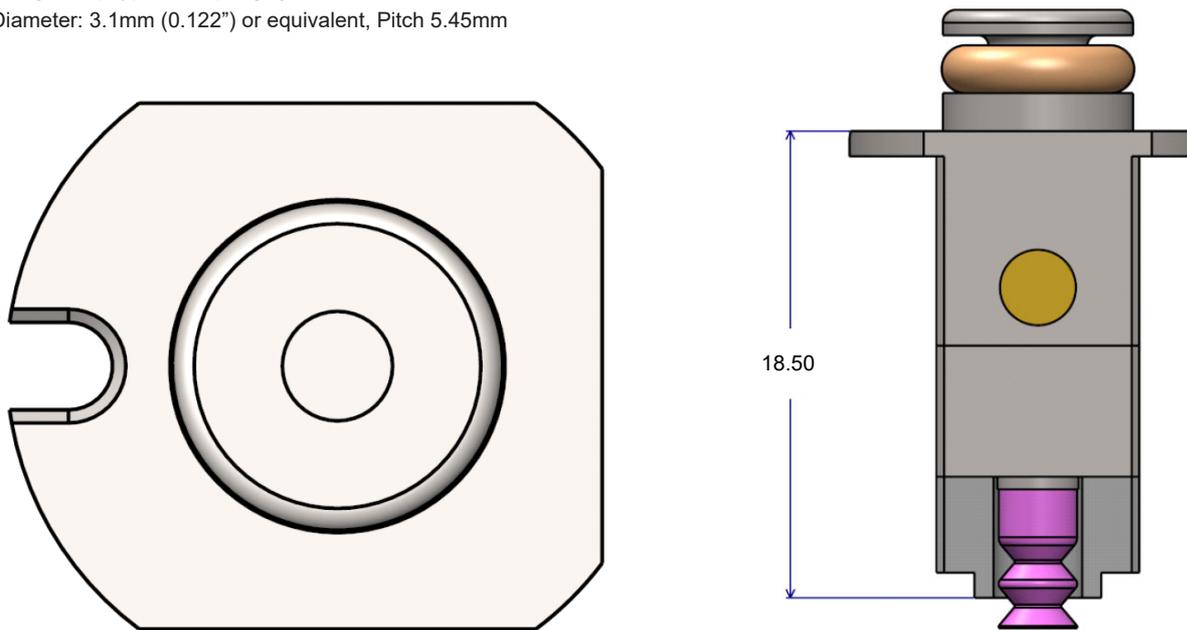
Suggested Power Tower Pickup Tool – Top and Side View
